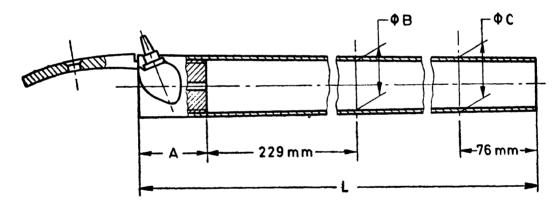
FIG. I DIMENSIONS FOR BARREL FOR MUZZLE LOADING SHOT GUN
